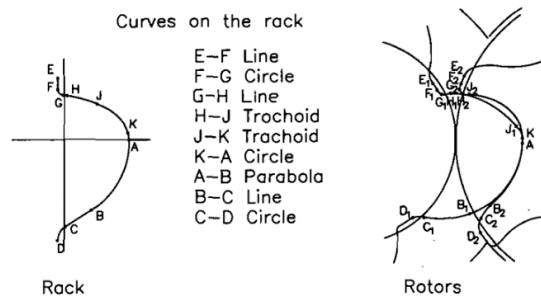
N rotor 5/6 primary profile on a rotor rack and rotor profile
